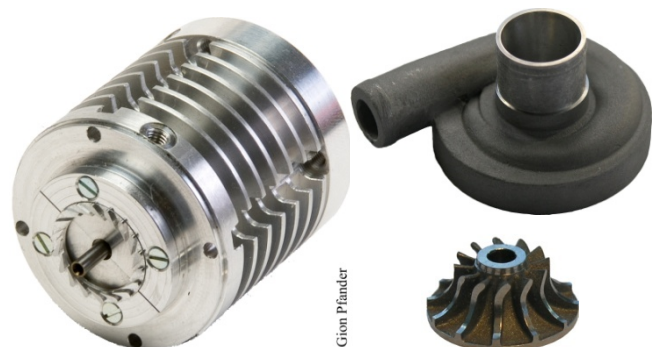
PM Generator with stator guide vanes, spiral casing and the radial turbine ($d = 10.5$ mm).
